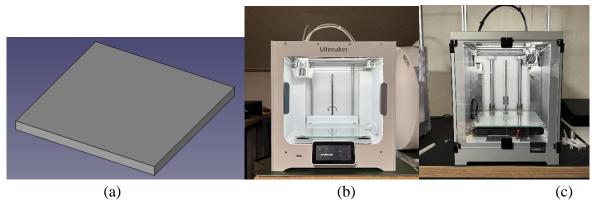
Used 3D printer and 3D modeling (a) 3D modeling of shielding (b), (c) 3D printer
